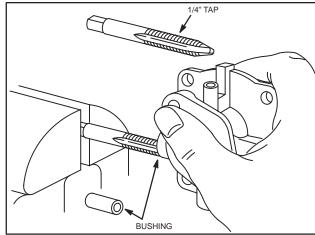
REPLACING THROTTLE SHAFT BUSHINGS
